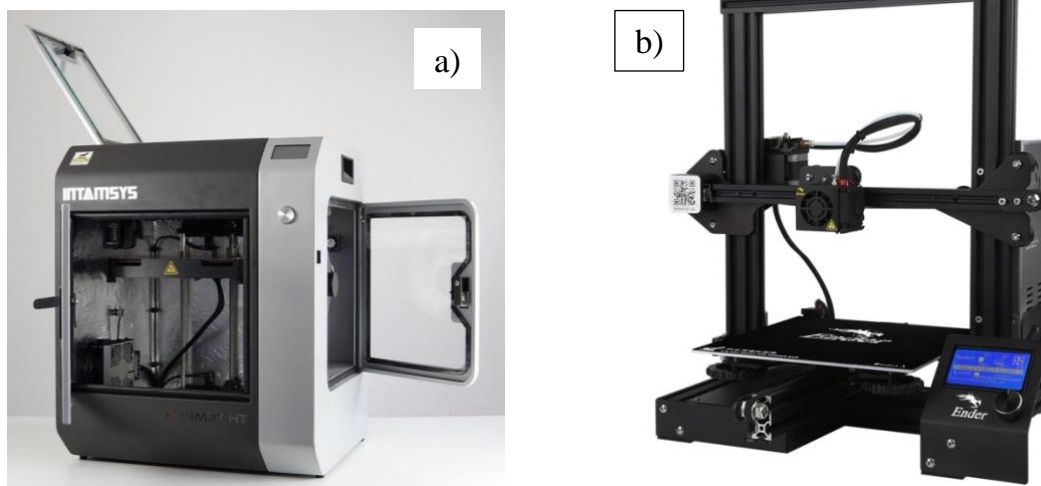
(a) Intamsys Funmat HT 3D printer (Shanghai, China); (b) Creality® Ender 3 3D printer.
